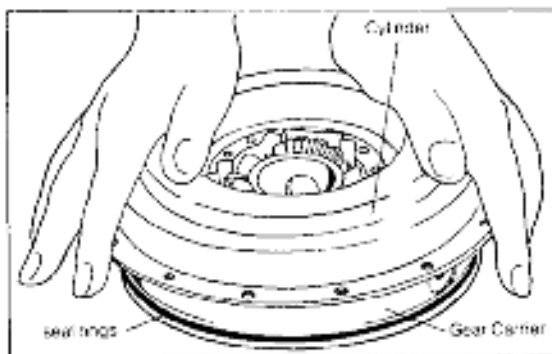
Pressing Cylinder on Bevel Gear Carrier
